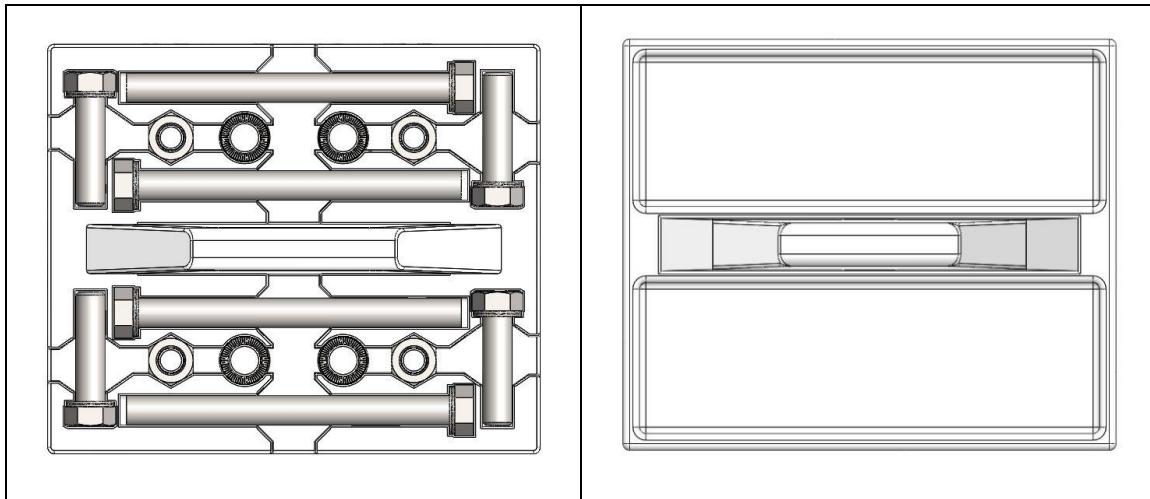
Top view (left) and bottom view (right) of right-hand suspension hardware fixture [62].
